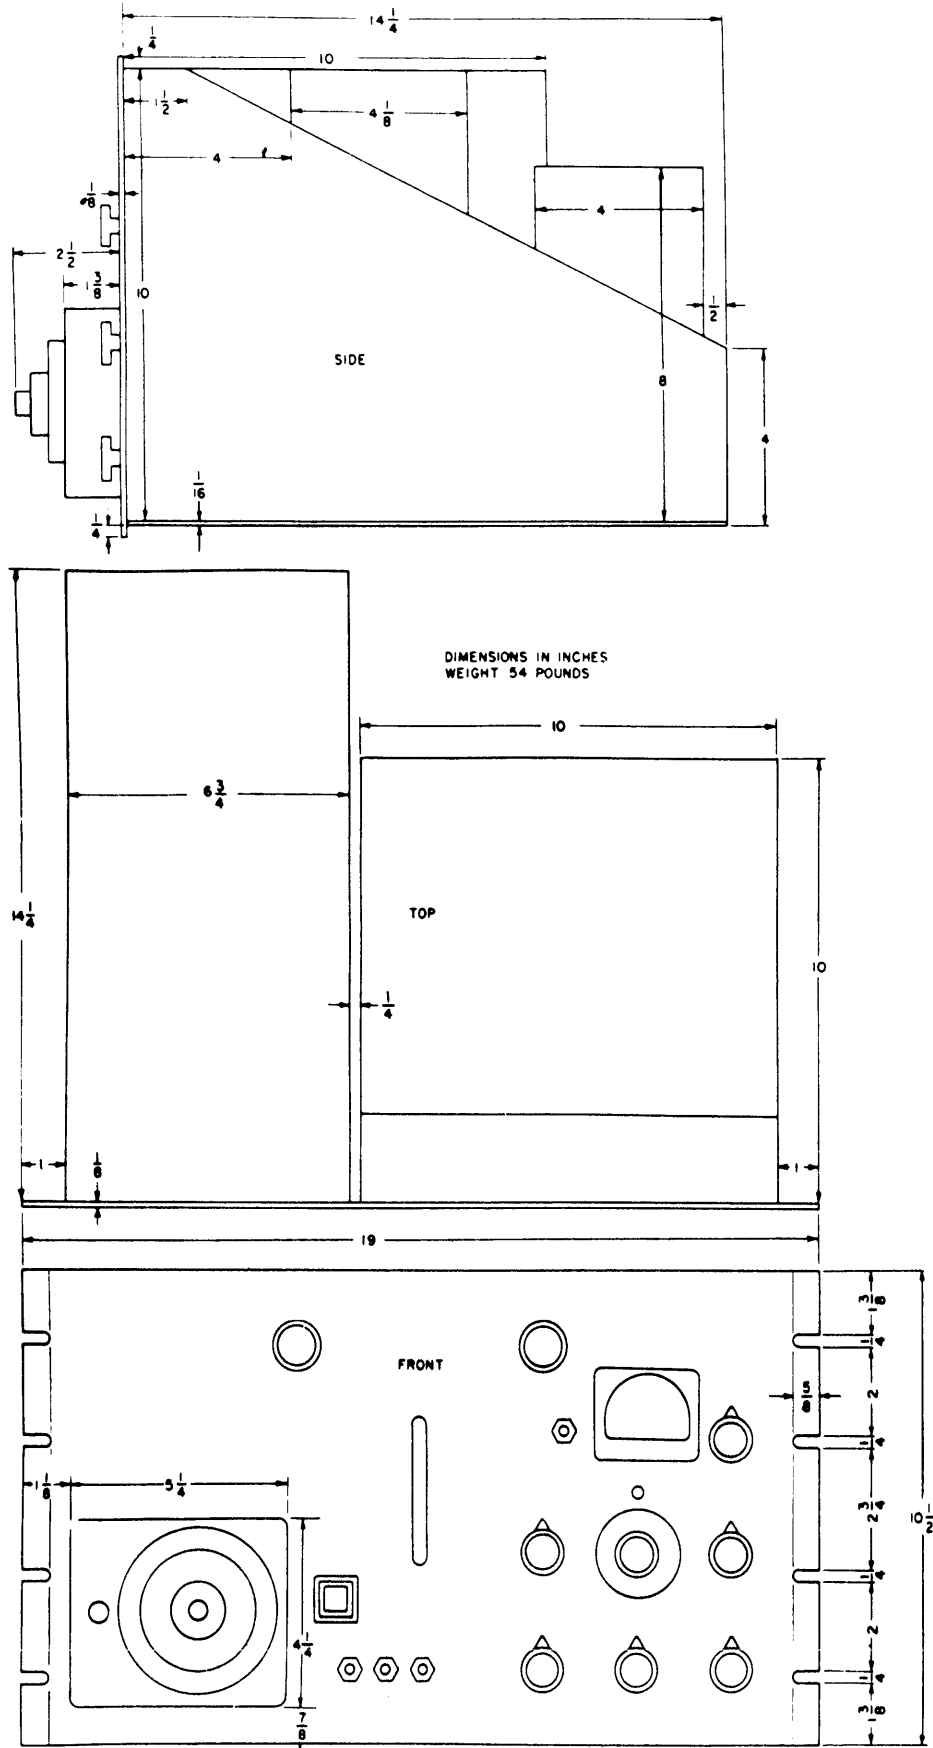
Variable Master Oscillator Type 115 Model 1, Outline Dimension Drawing
